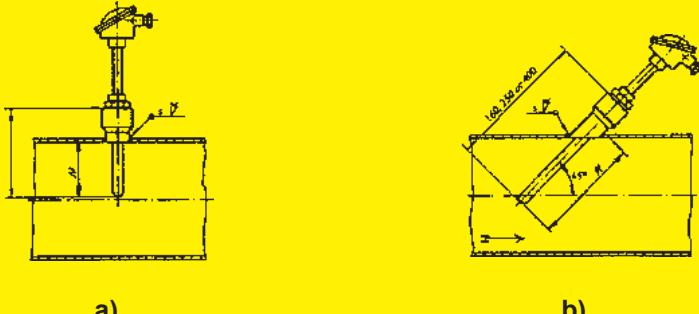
shows the different positions of the mounting boss. Sensor or thermo-meter is usually mounted perpendicularly (a). If dimension N is greater than 3/4 of the pipe diameter, position b will be used.
